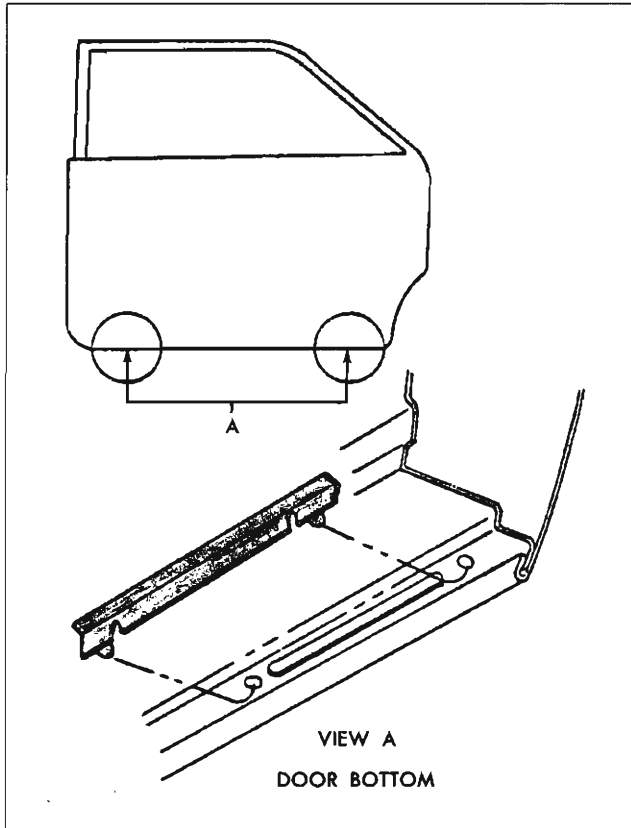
Door Bottom Drain Hole Sealing Strip
